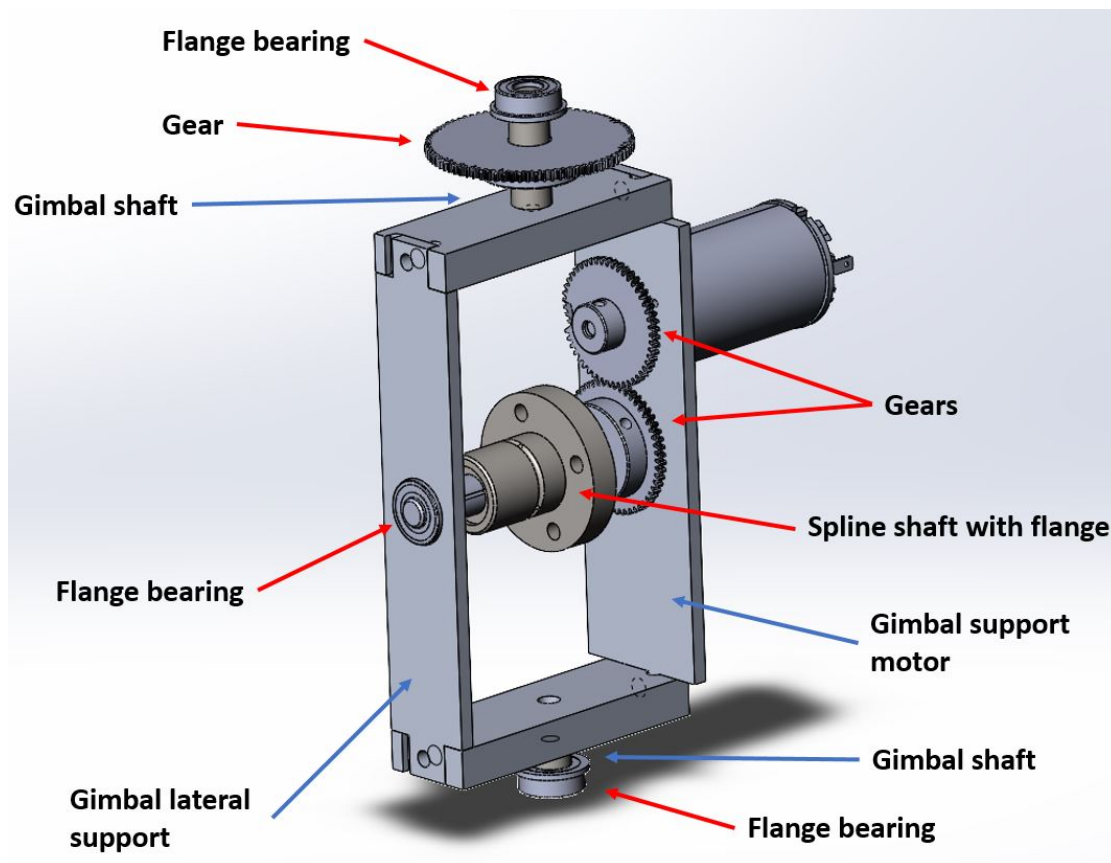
Assembly of the CMG without the flywheel. The parts identified on the drawing by a red arrow refers to bought materials and those designated by a blue arrow are those machined.
